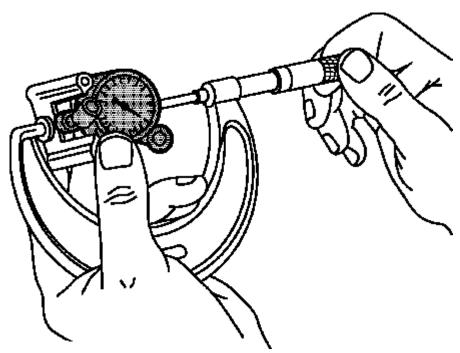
Measuring Bore Gauge With Micrometer Courtesy of GENERAL MOTORS CORP.
